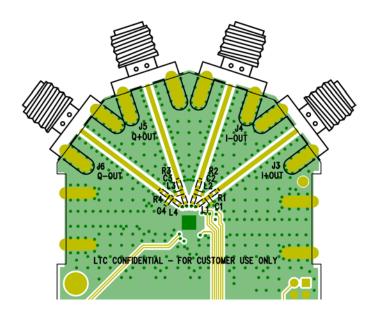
Alternate Layout of PCB with Baseband Outputs on the Backside
